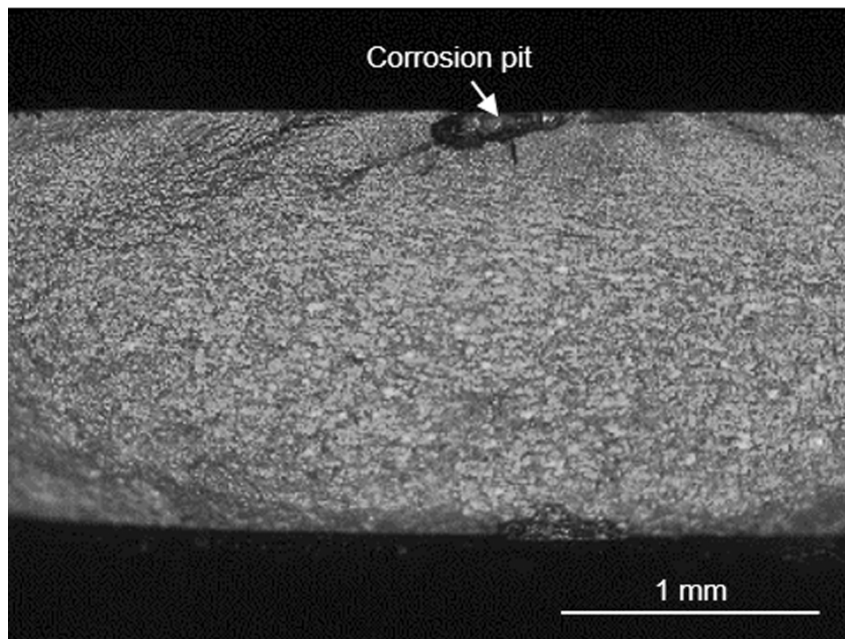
Fracture surface of FSW joint with 96-h corrosive exposure (tunneling pit)
